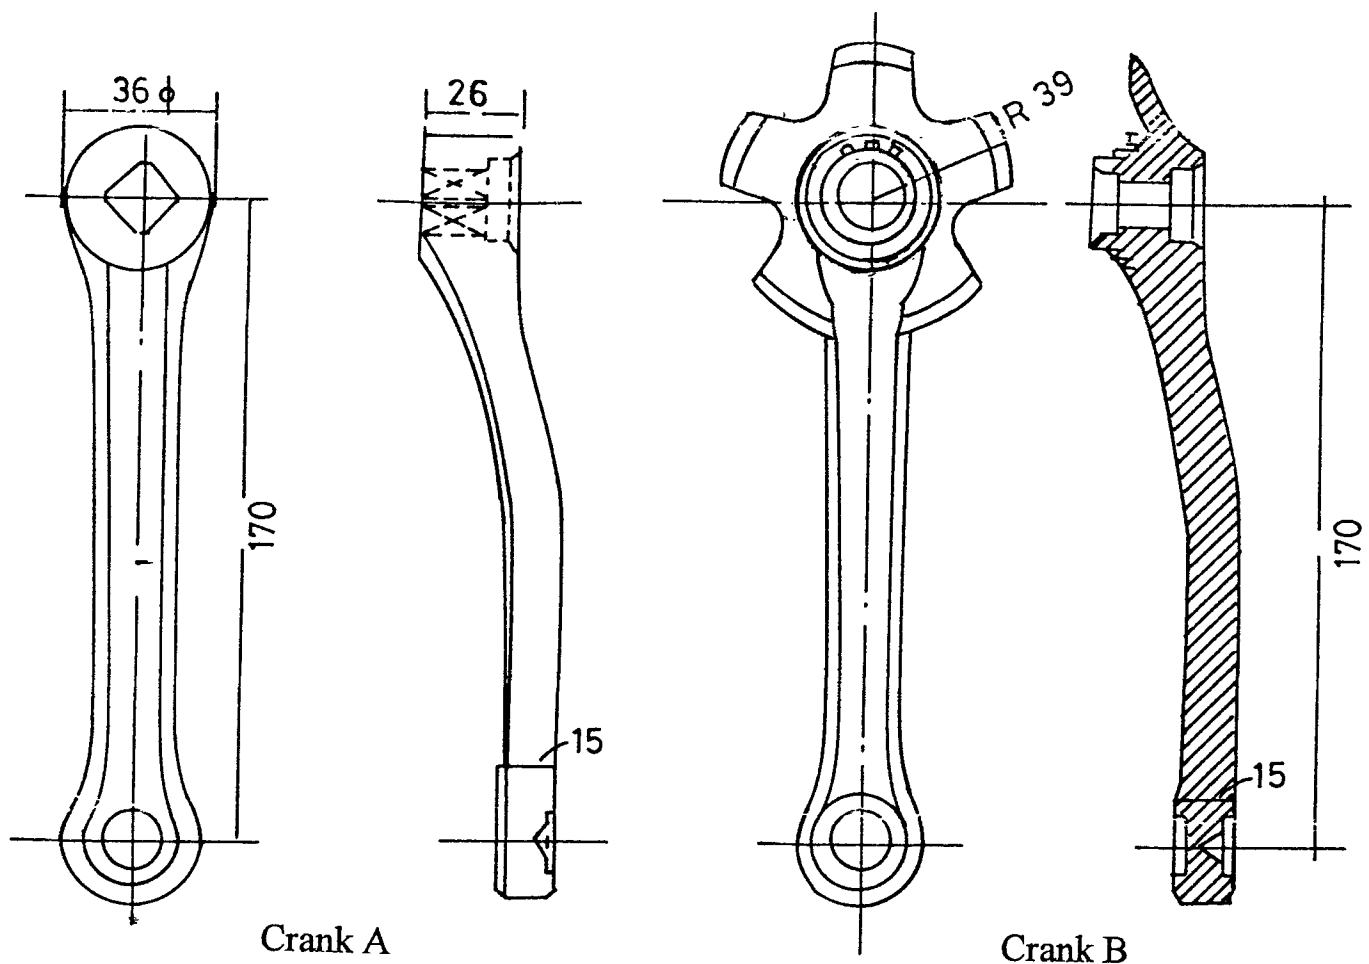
Dimensions (in millimeters) of two squeeze-cast Al-7Si-0.3Mg cranks
